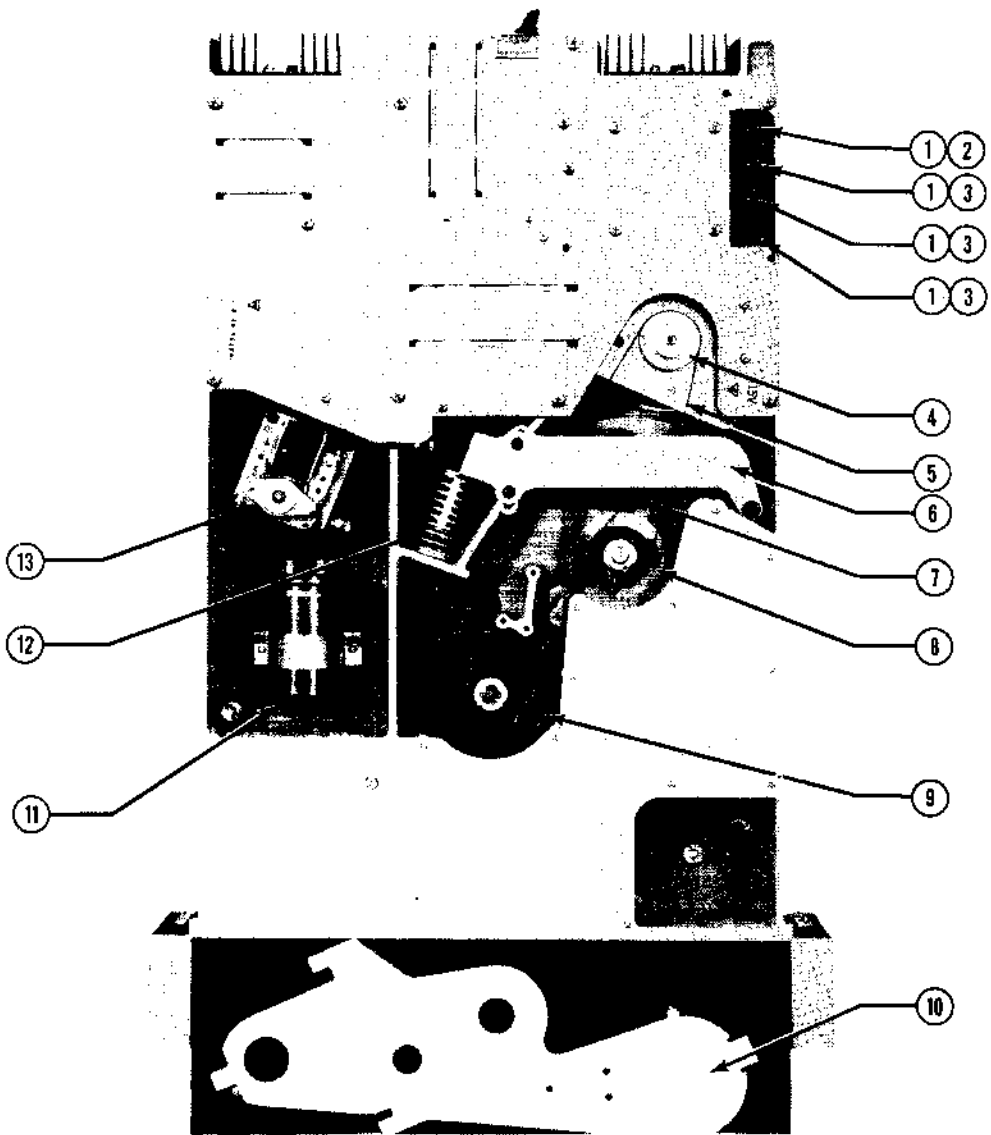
D3000 Disk Drive Photo Parts Index, PCBAs in Extended Position
